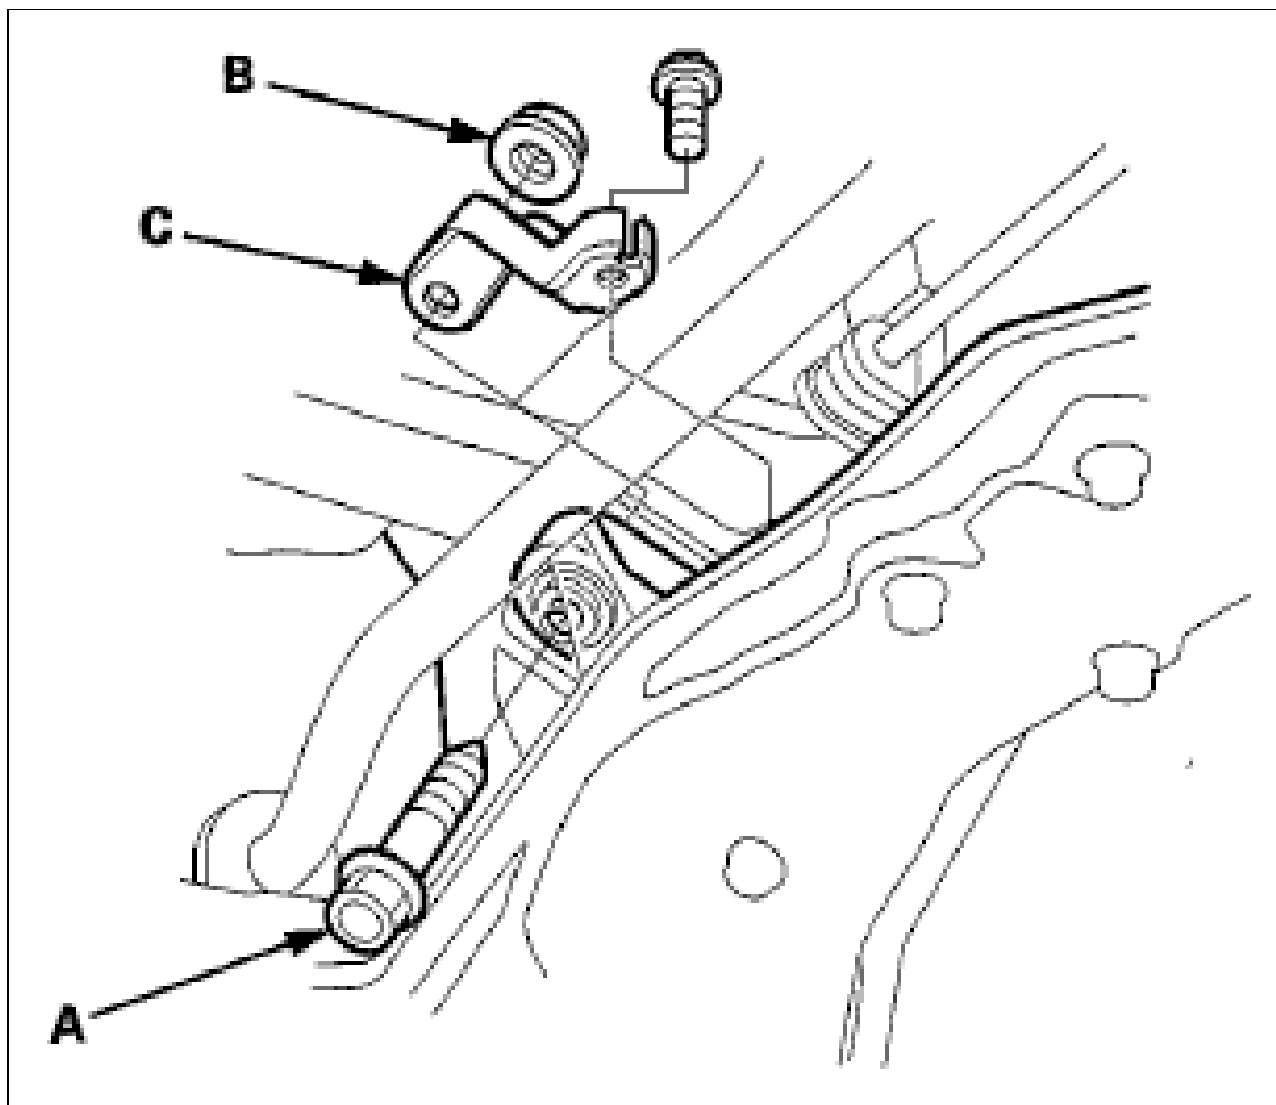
Identifying P/S Fluid Line Bracket Bolts And Steering Gearbox Mounting Bolt
